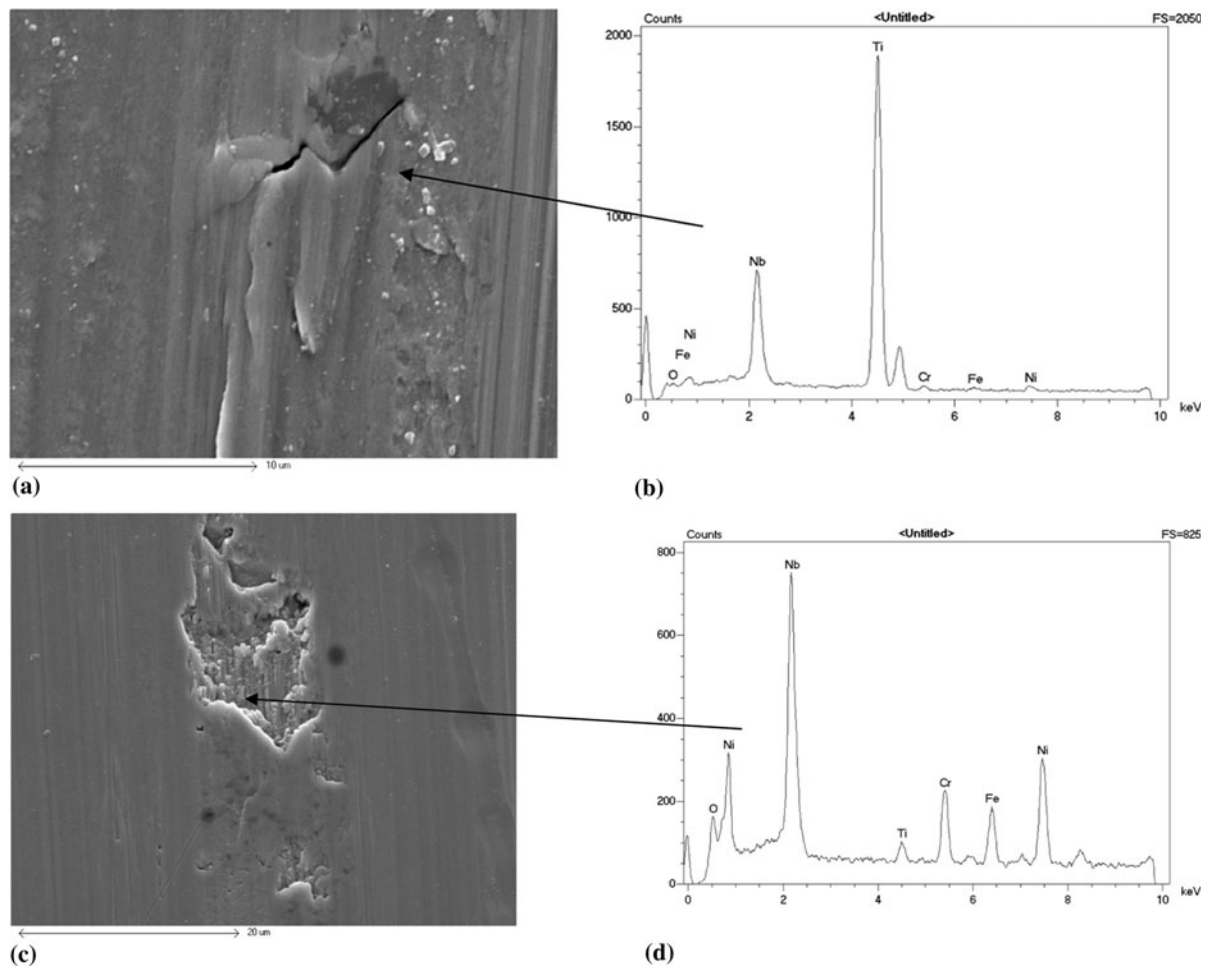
SEM EDS data on surface morphology and defects formation on the machined surface of DA 718 alloy: (a, b) cracks and (c, d) tears
